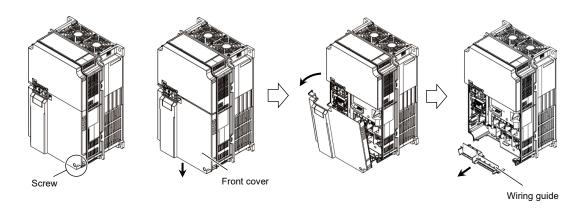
Removal of the front cover and the wiring guide (for FRN0115E3S-2G)
